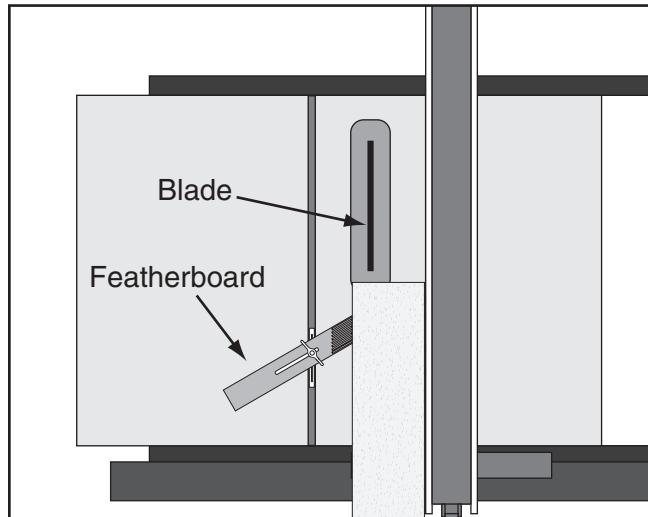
Featherboard installed in miter slot and supporting workpiece for ripping cut.
